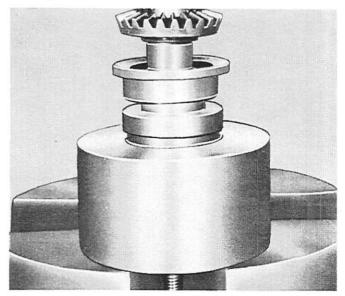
Installing Propeller Shaft Gear Ball Bearing and Retainer
